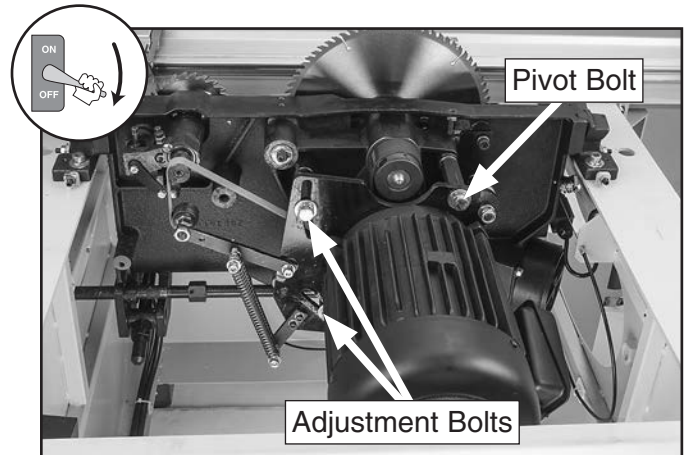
Location of adjustment and pivot bolts (cast-iron table removed).
